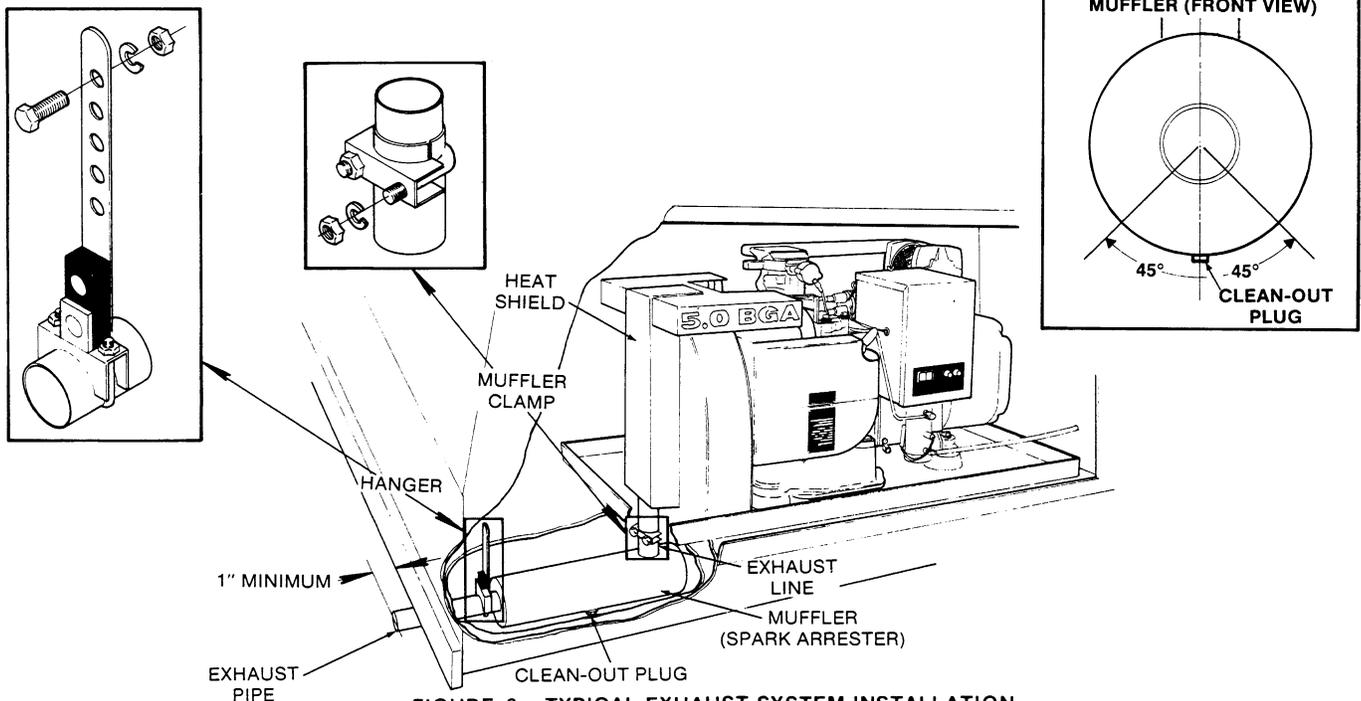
TYPICAL EXHAUST SYSTEM INSTALLATION
